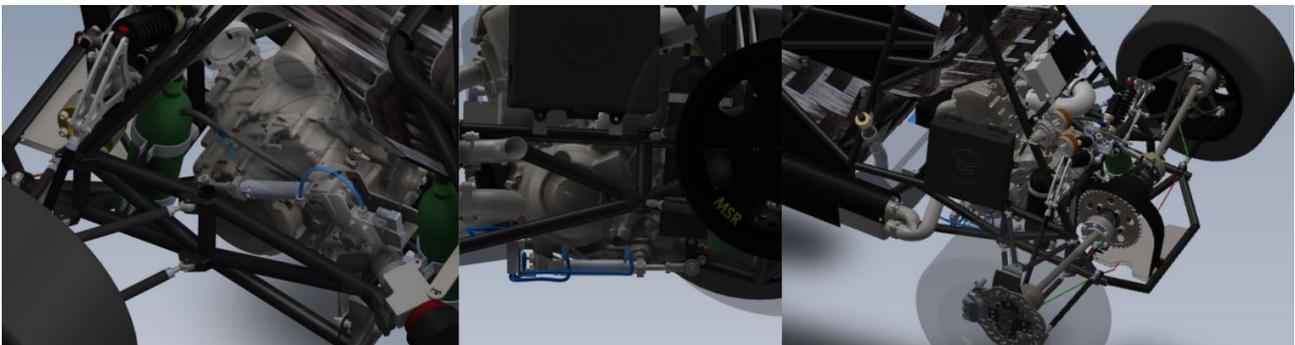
Final Design View: Clutch Actuator, Gear Selector Shaft Actuator, Tank Layout
